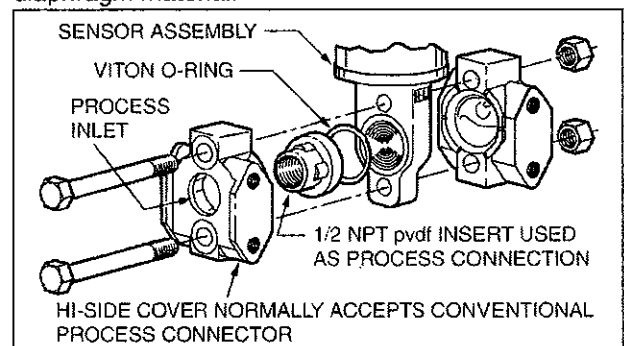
Bracket-Mounted Transmitter Shown with 1/2 NPT pvdf Insert Installed in HI-Side Cover
